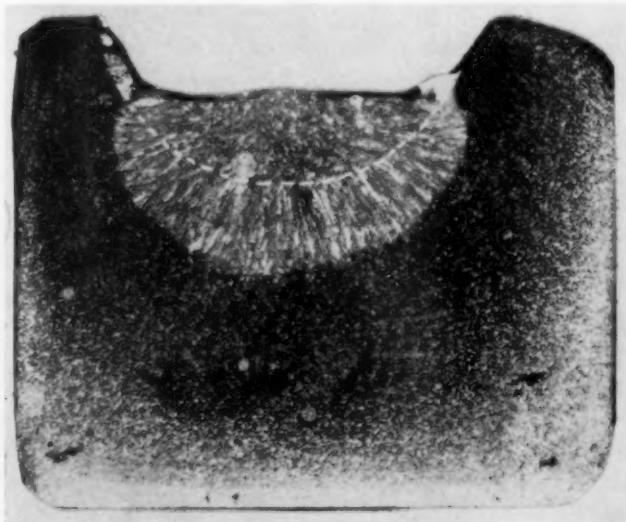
STEEL CCM25 WELDED WITH A PREHEAT OF 600°F. SHOWING DEPTH OF MELTING.
